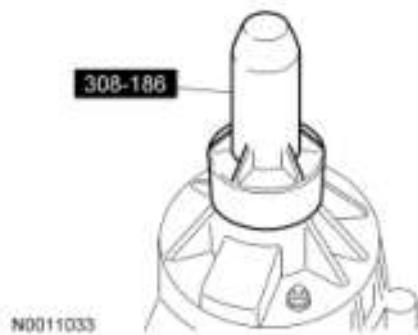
Installing Rear Output Shaft Oil Seal Using Special Tools (308-186)
